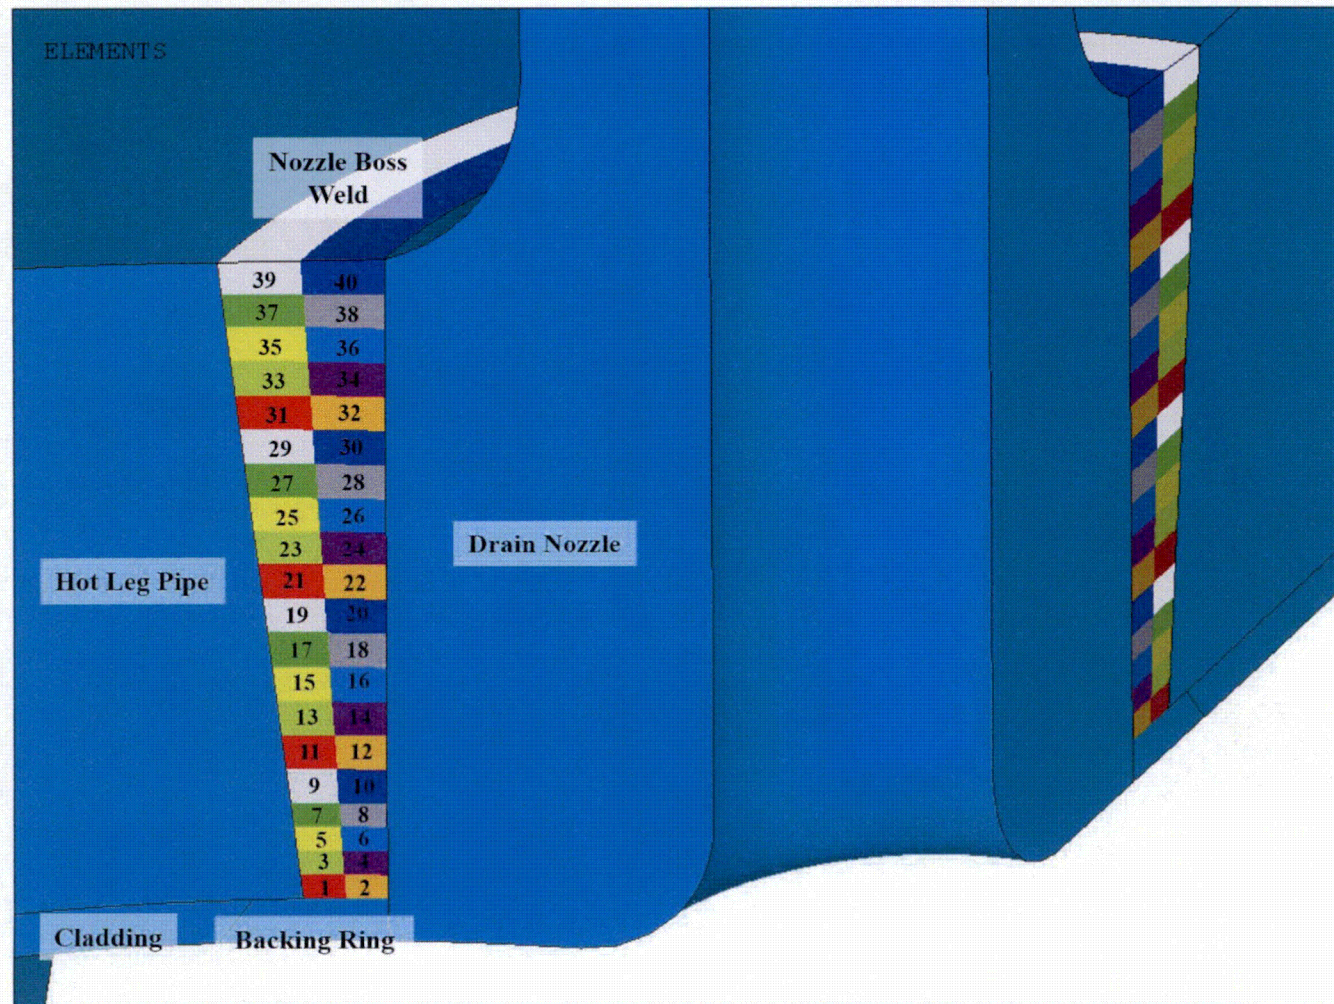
Weld Nugget Definitions for the Hot Leg Drain Nozzle Boss Weld
